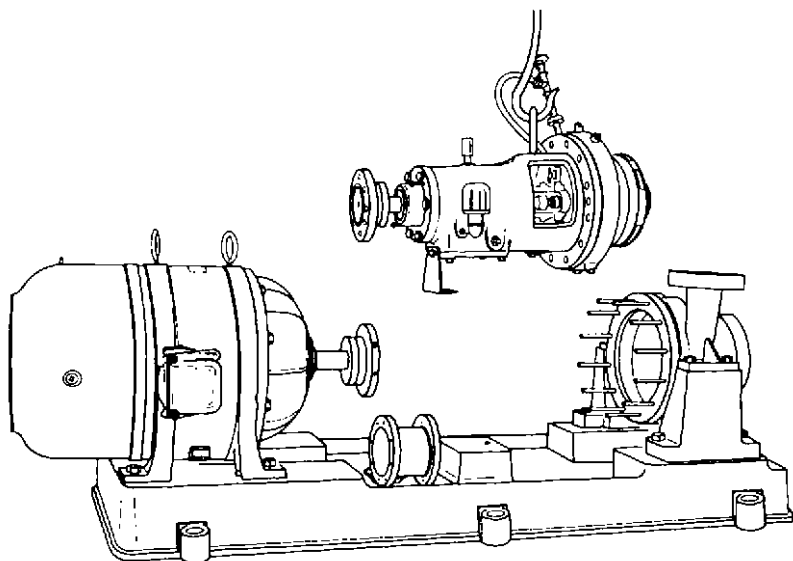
Spacer coupling enables end-suction pump to be dismantled without moving piping, pump casing, or driver (Worthington Pump).
